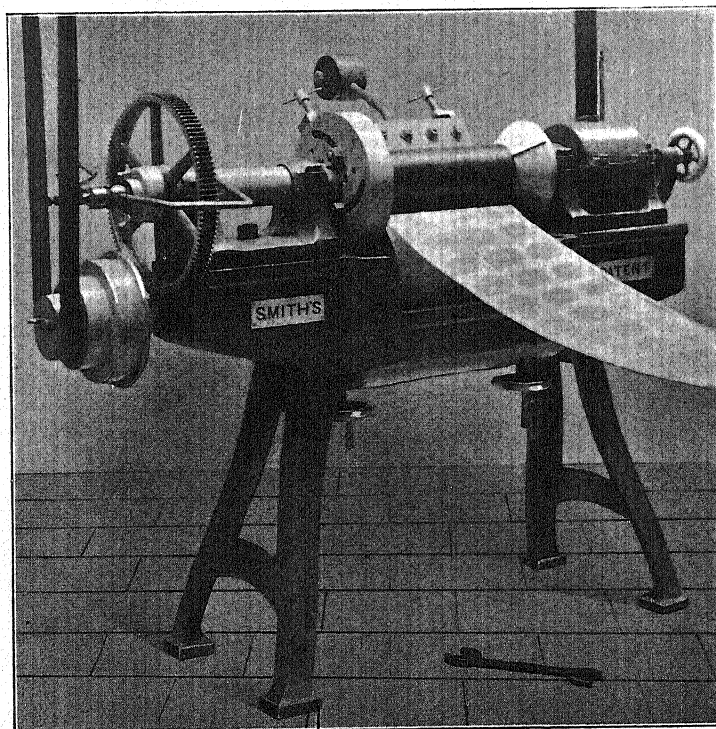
Roller printing machine. (*By Thomas Smith & Co., Hanley.*)
